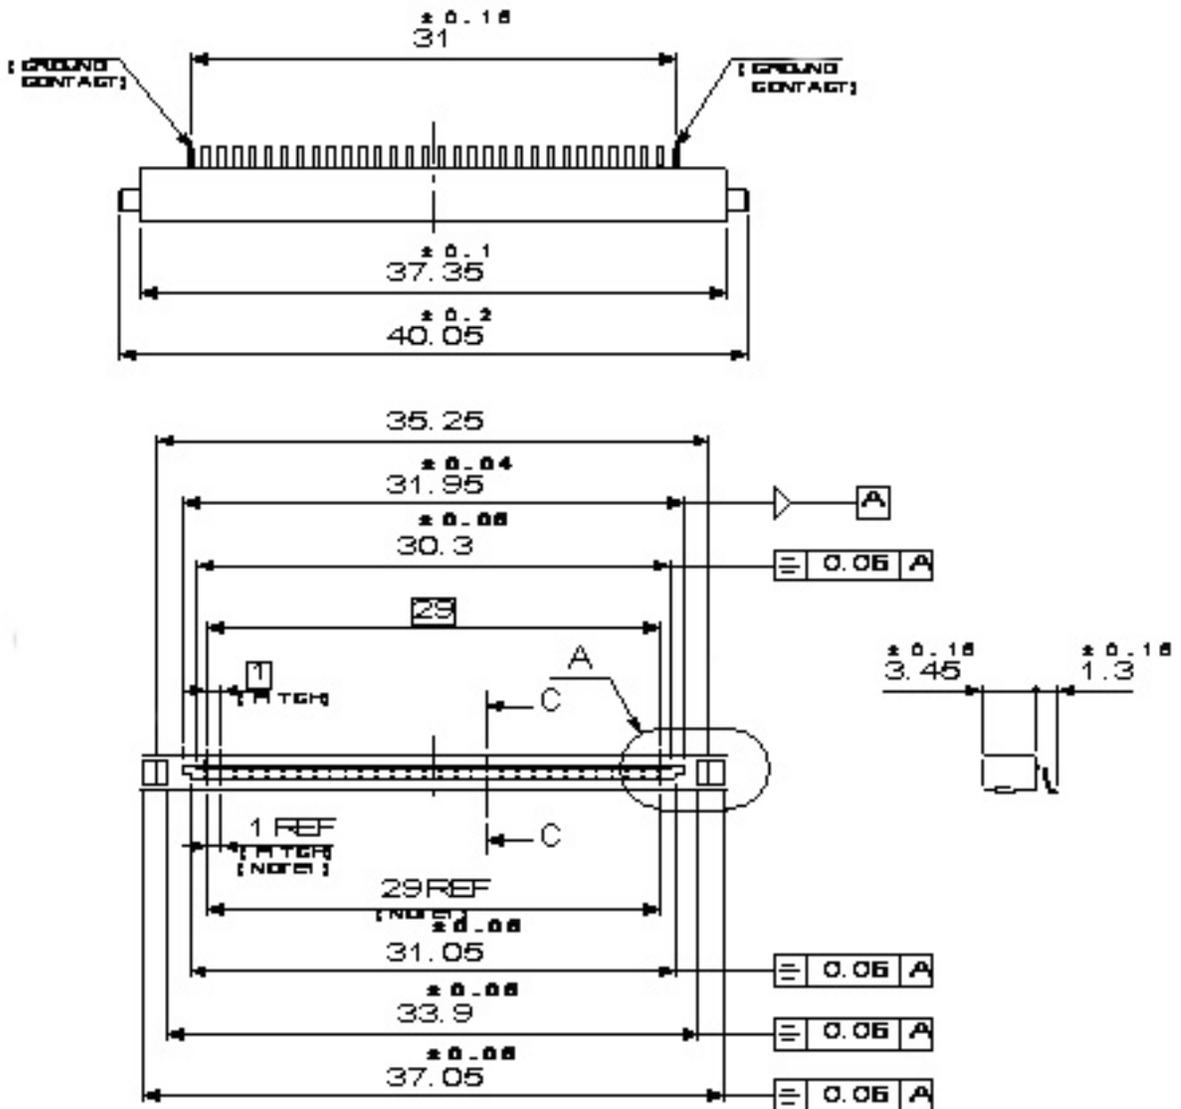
Panel-side Internal PCB Mount Receptacle Connector with Pin 1 Shown
